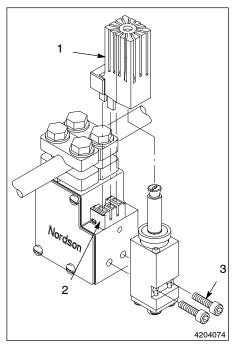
Removing the Gun Module and Coil from the Manifold
